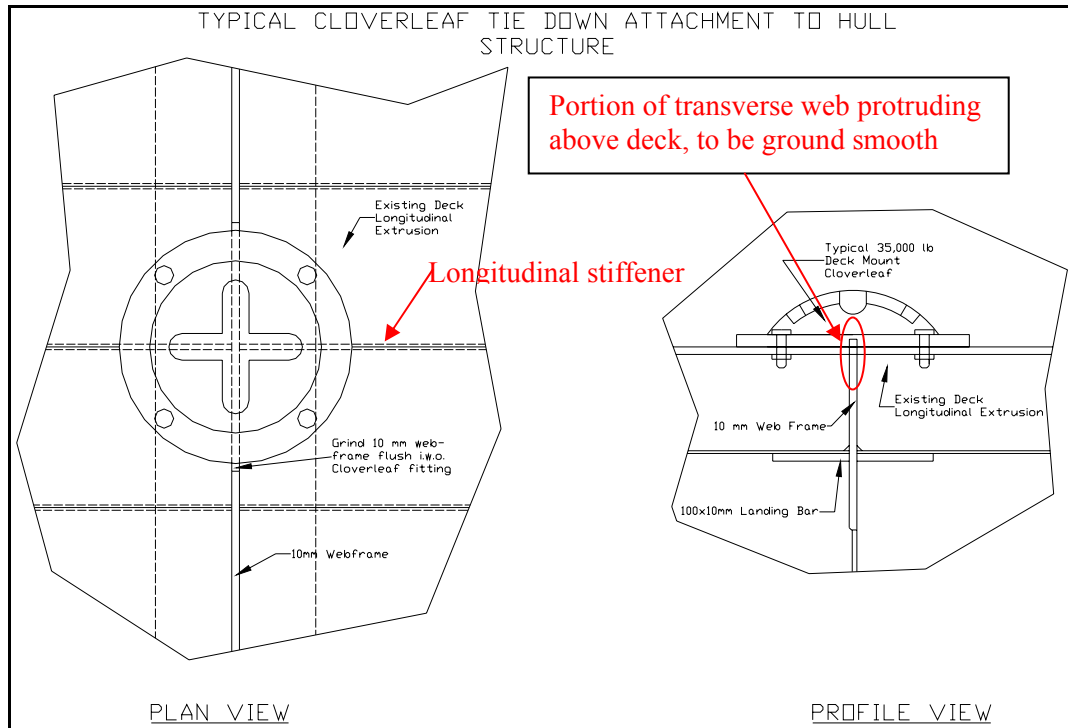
Detail of Vehicle Tiedown Installation Proposed for PacifiCat
